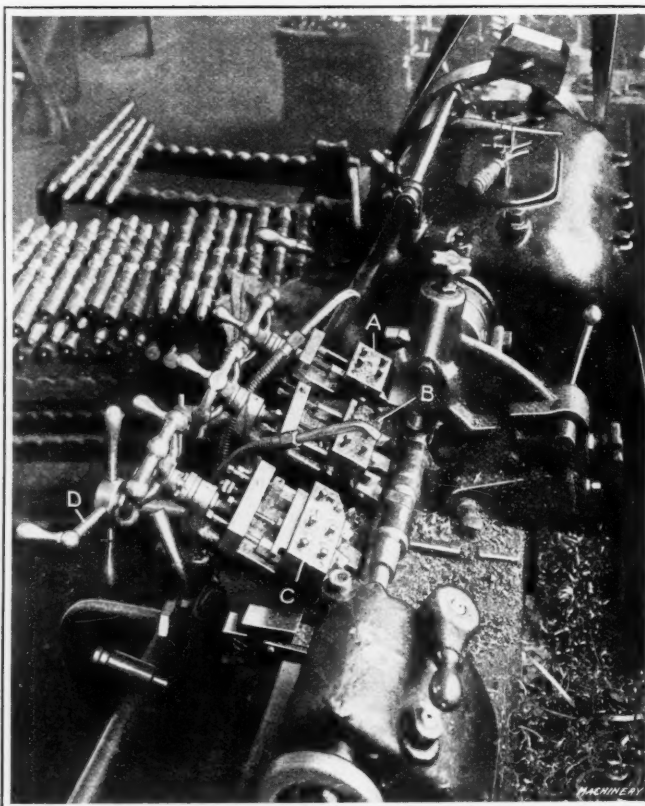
Fitchburg "Lo-Swing" Lathe tooled up for turning Bearing for Steadyrest; rough- and finish-turning Front Bearing, Gear Fit, Threaded End and Collar; and rough-turning between Cams and Pump Eccentric on Cam-shafts
